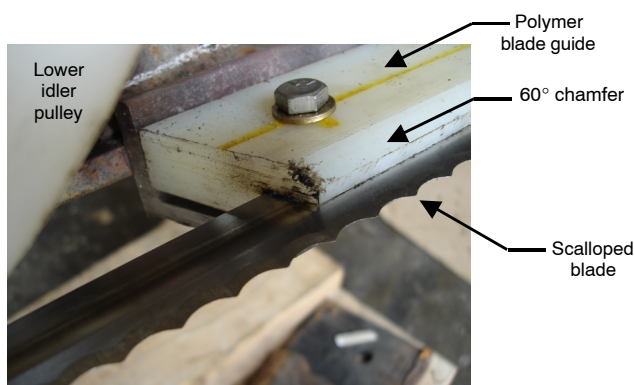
Prototype polymer blade guide installed on the prototype harvester.
